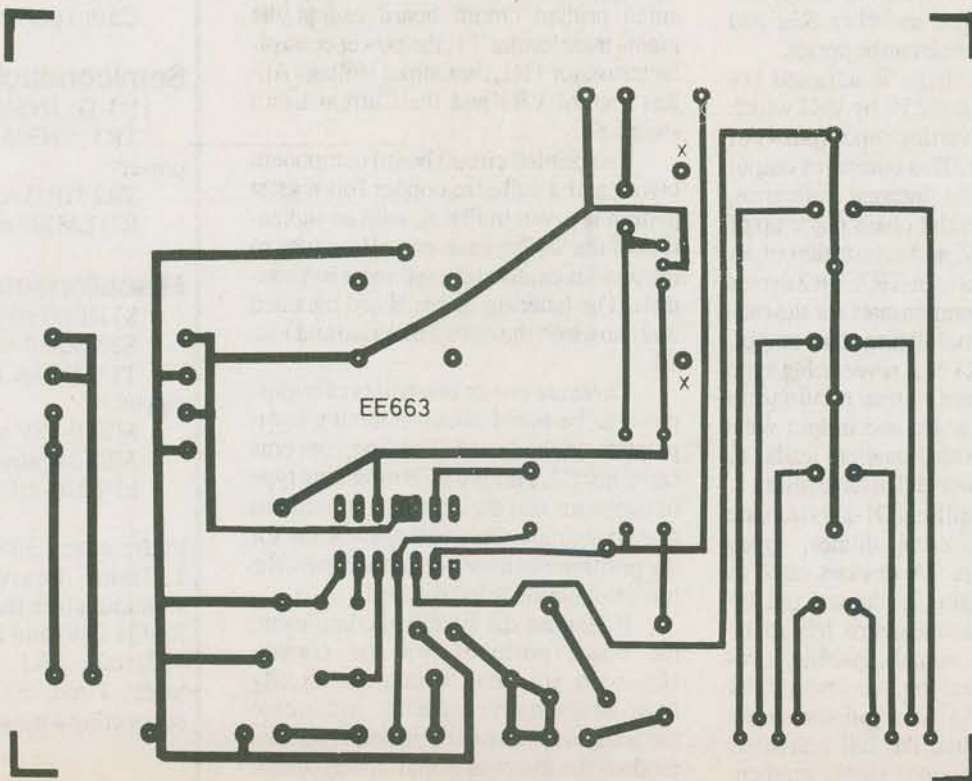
The printed circuit and parts overlay for the 25V/2A supply.
